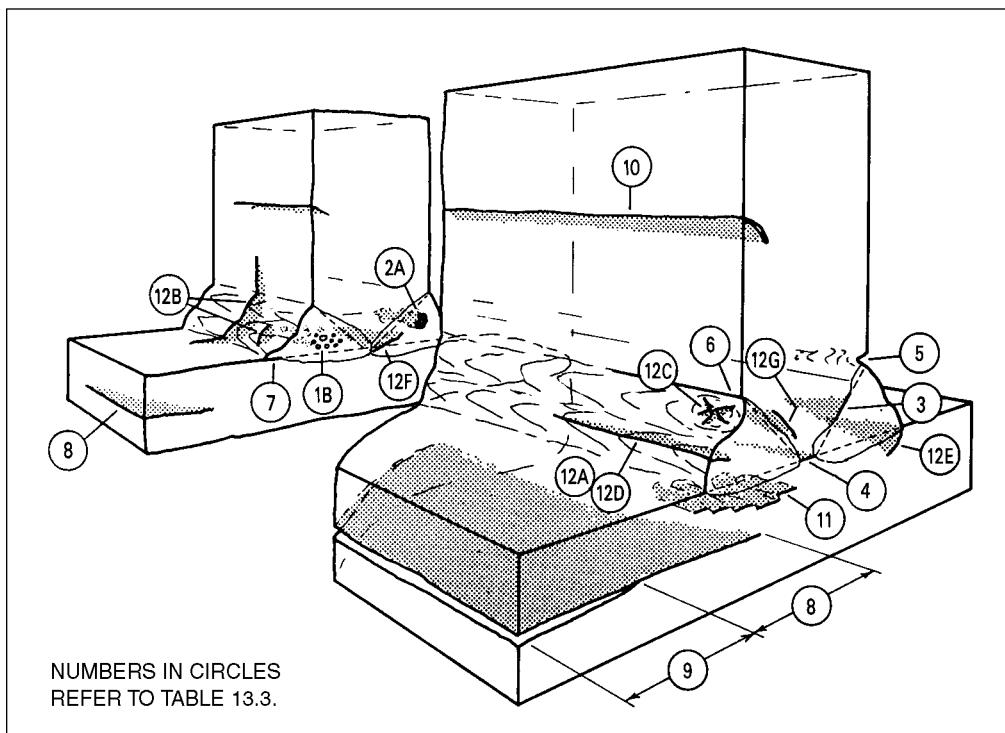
Discontinuities in a Single-Bevel-Groove and Fillet Welds in a Corner Joint
